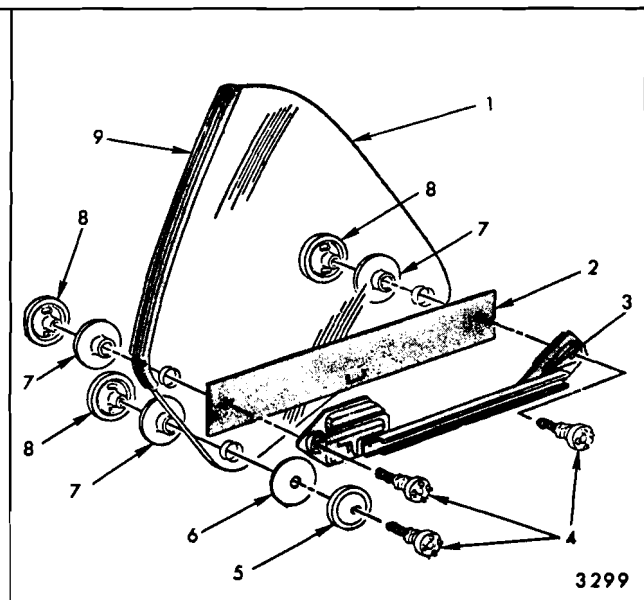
Rear Quarter Window Assembly - "Z-67" Style
